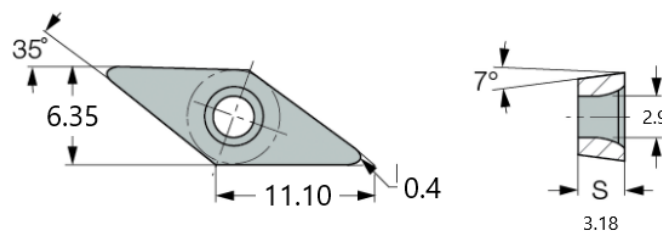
Dimensional Sizes of ISCAR's VCGT-110304-AS IC20 Cutting Insert, used for Aluminium Cutting Roughing Cut (modified after iscar.com, 2018)
